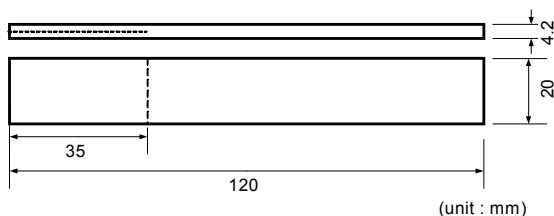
Configuration of Mode II interlaminar fracture specimen
